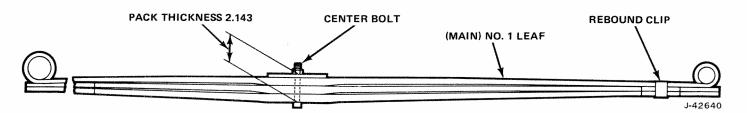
Rear Tapered Leaf Spring Assembly-Typical
